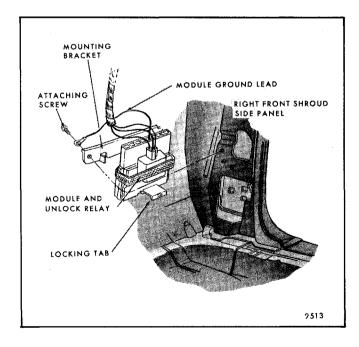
Automatic Door Lock Module and Unlock Relay Installation (Cadillac C, D, K Styles)
